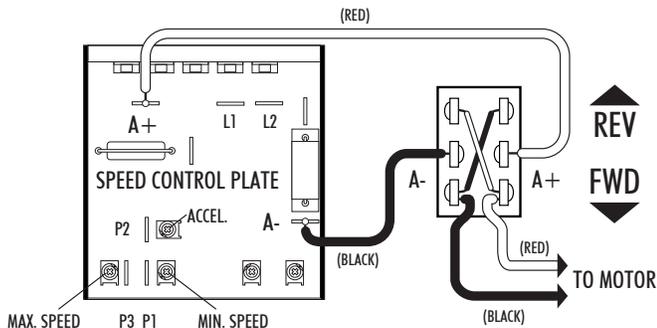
Wiring the switch to reverse motor direction. Also shown are lug attachment points and wire colors for the Sherline DC motor.
